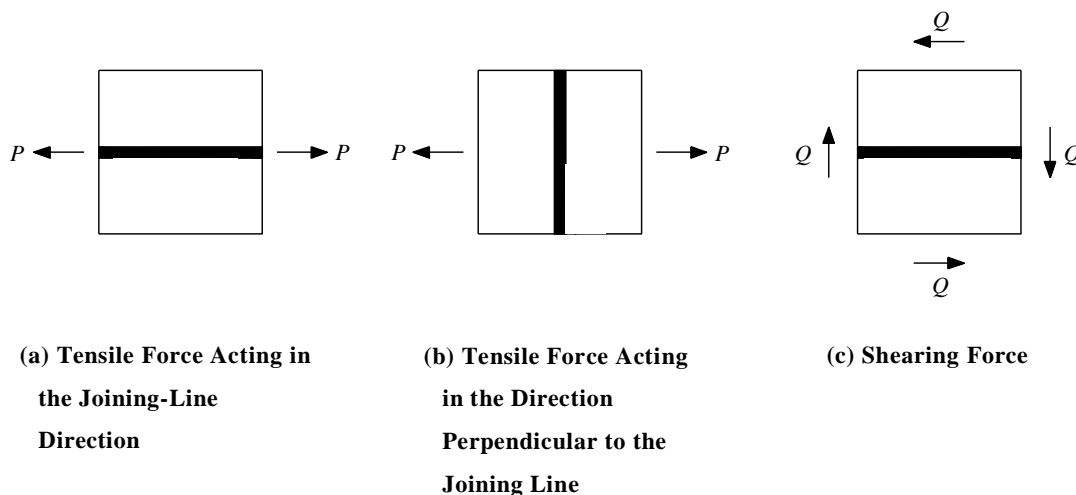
Forces Acting on Members with Welded Joints
